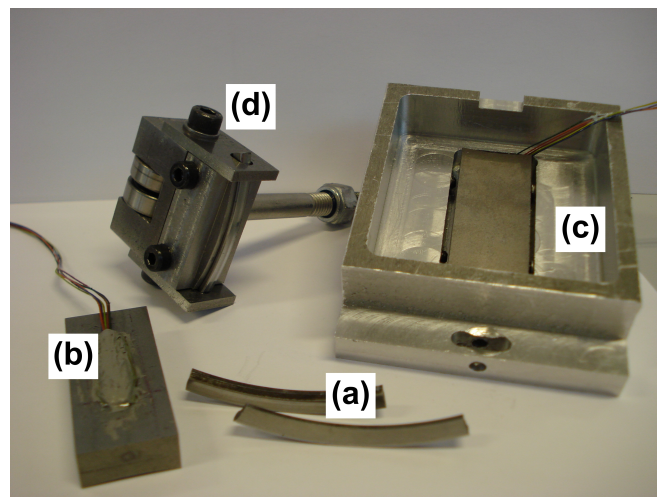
A photograph showing the components manufactured for this ultrasonic application: (a) piston ring sections, (b) cylinder liner section with ultrasonic transducers attached to the back side, (c) oil bath and cylinder liner holder, (d) ring adapter.
